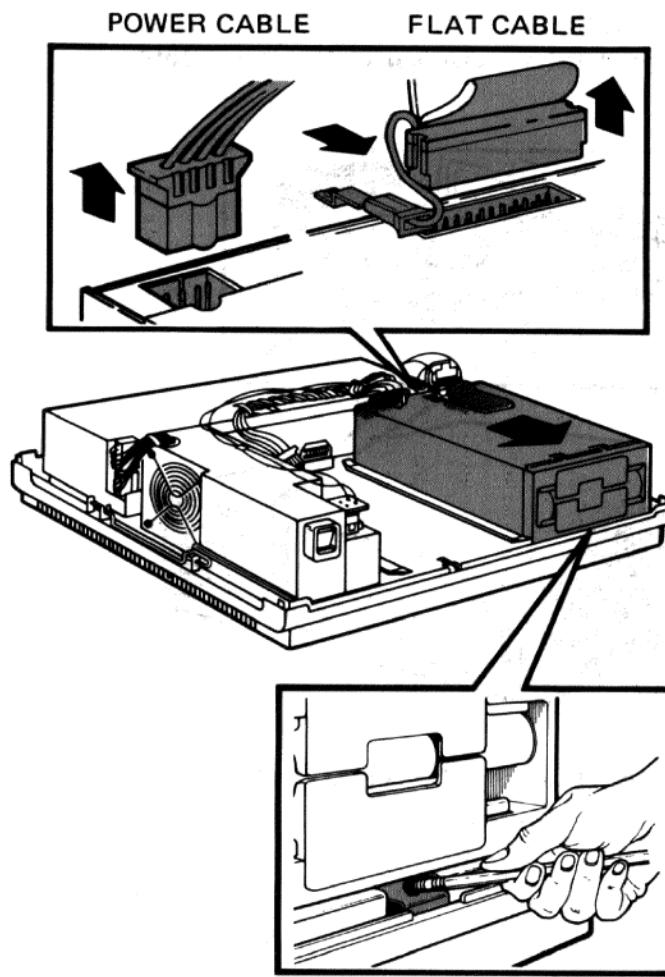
Diskette Drive Flat Cable and 4-Wire Power Cable Removal
